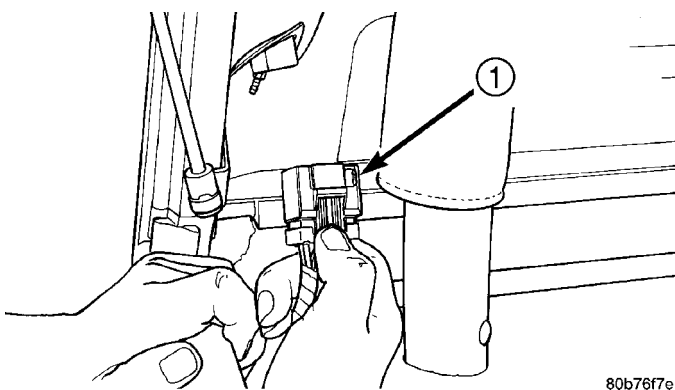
REAR WIPER WIRE HARNESS CONNECTOR
